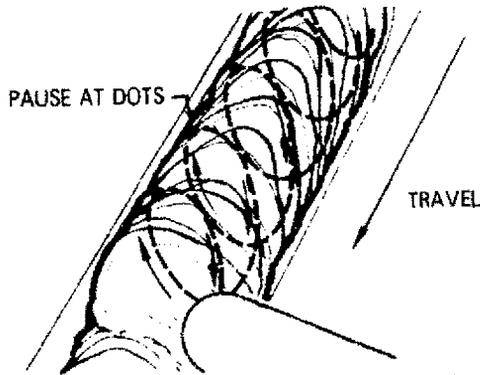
Method of downhill welding the root bead when the pipe is positioned at 45 degrees. The electrode is buried in the pipe joint and dragged along the pipe joint to deposit the bead.
